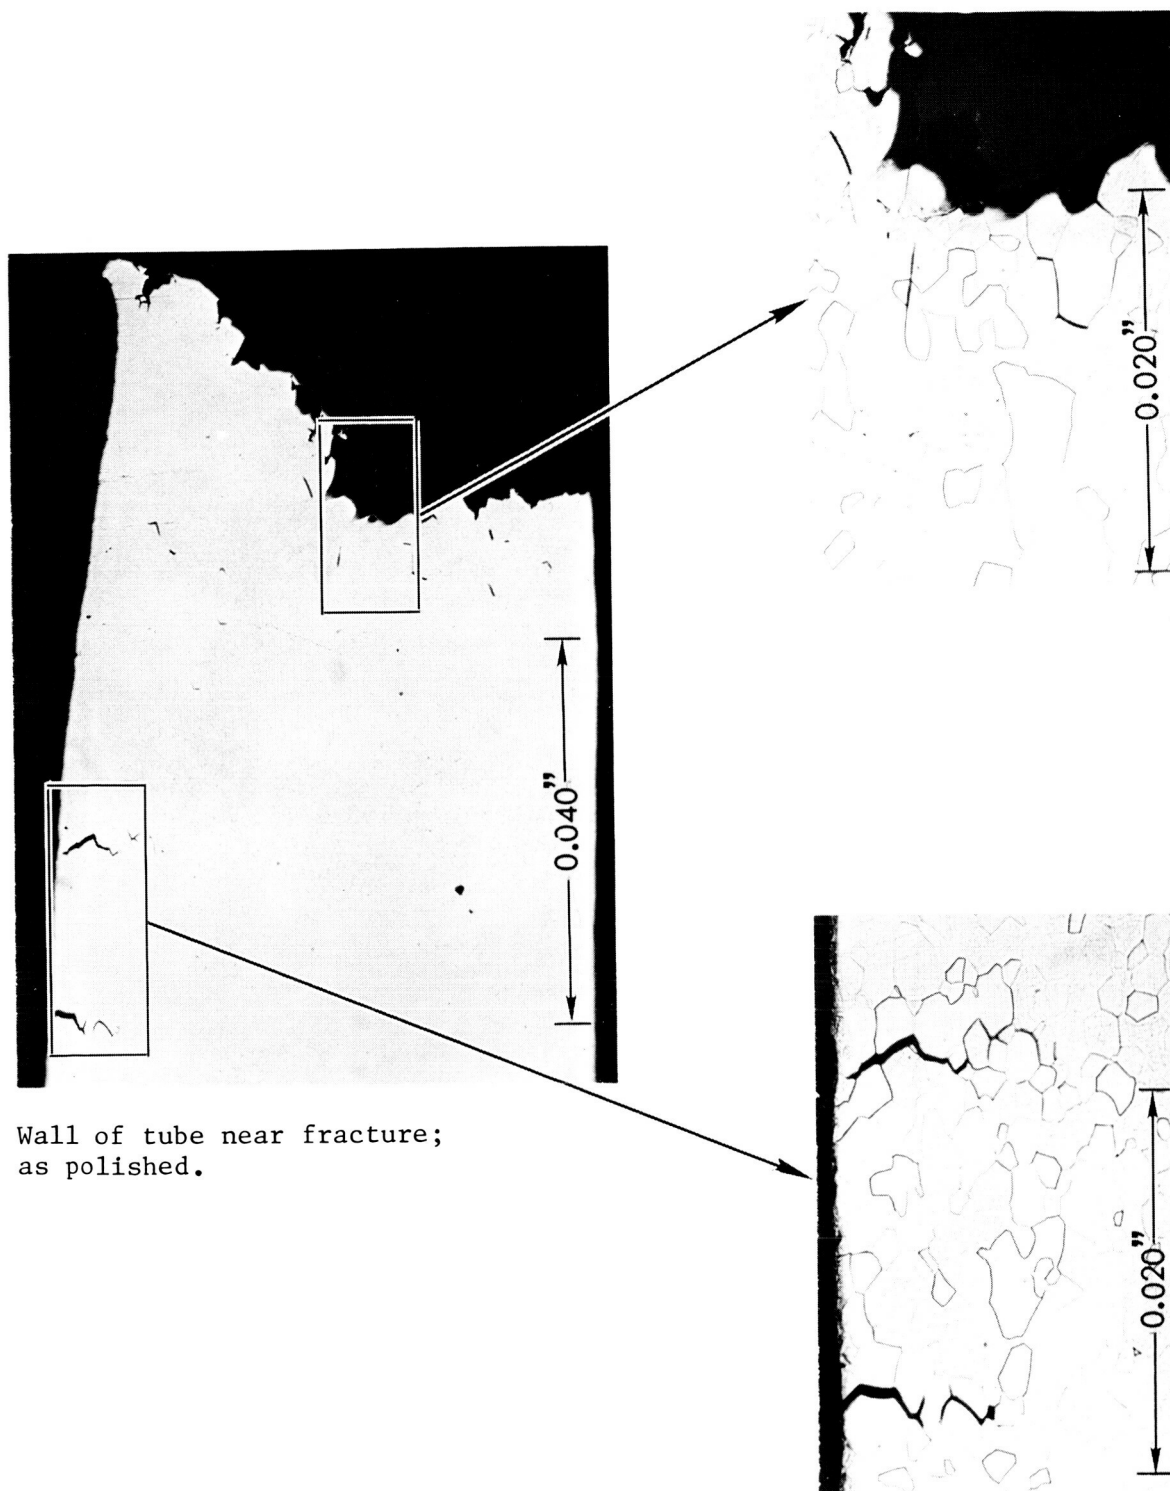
Longitudinal sections of fractured T-111 alloy thermocouple well after bending showing intergranular cracking in the wall on tension side of bend. Etchant: 30 grams  $\text{NH}_4\text{F}$ , 50 milliliters  $\text{HNO}_3$ , 20 milliliters  $\text{H}_2\text{O}$ .
